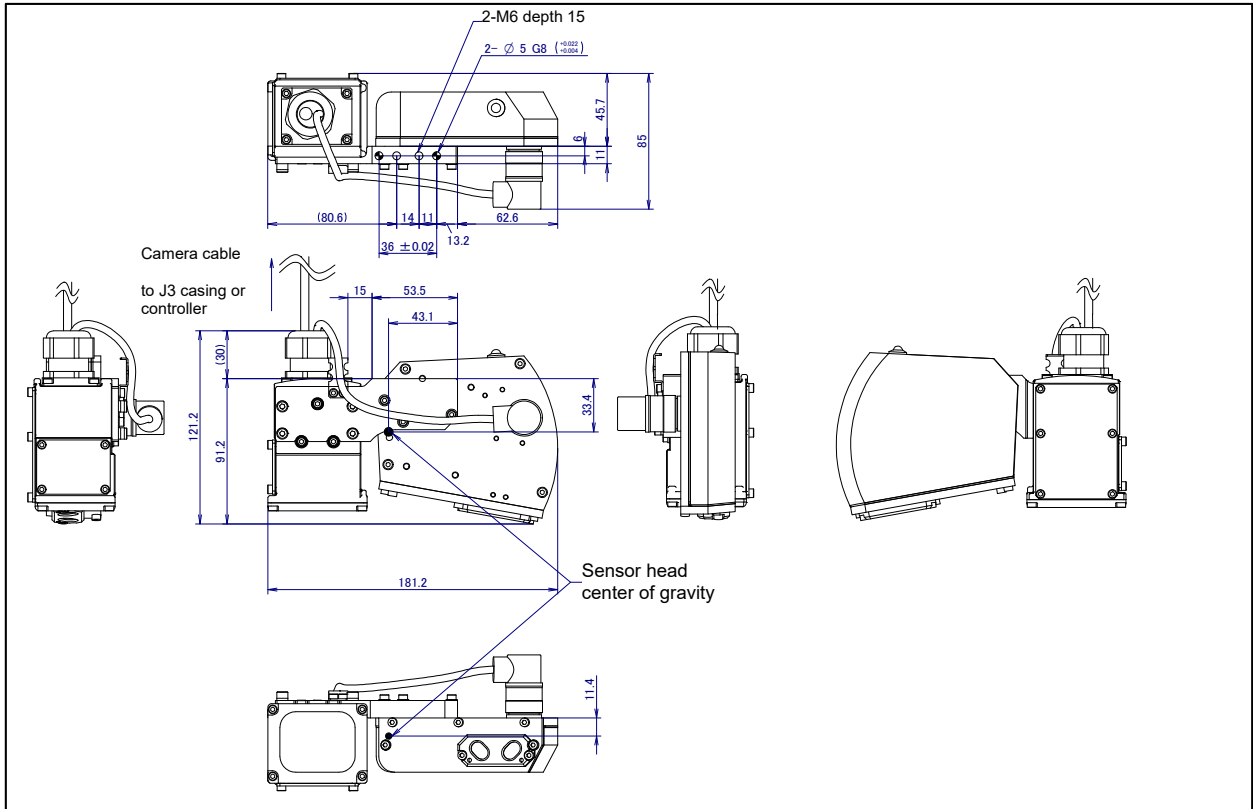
(b) External dimensions of the 3D Laser Vision Sensor Head (stand off 600mm)
